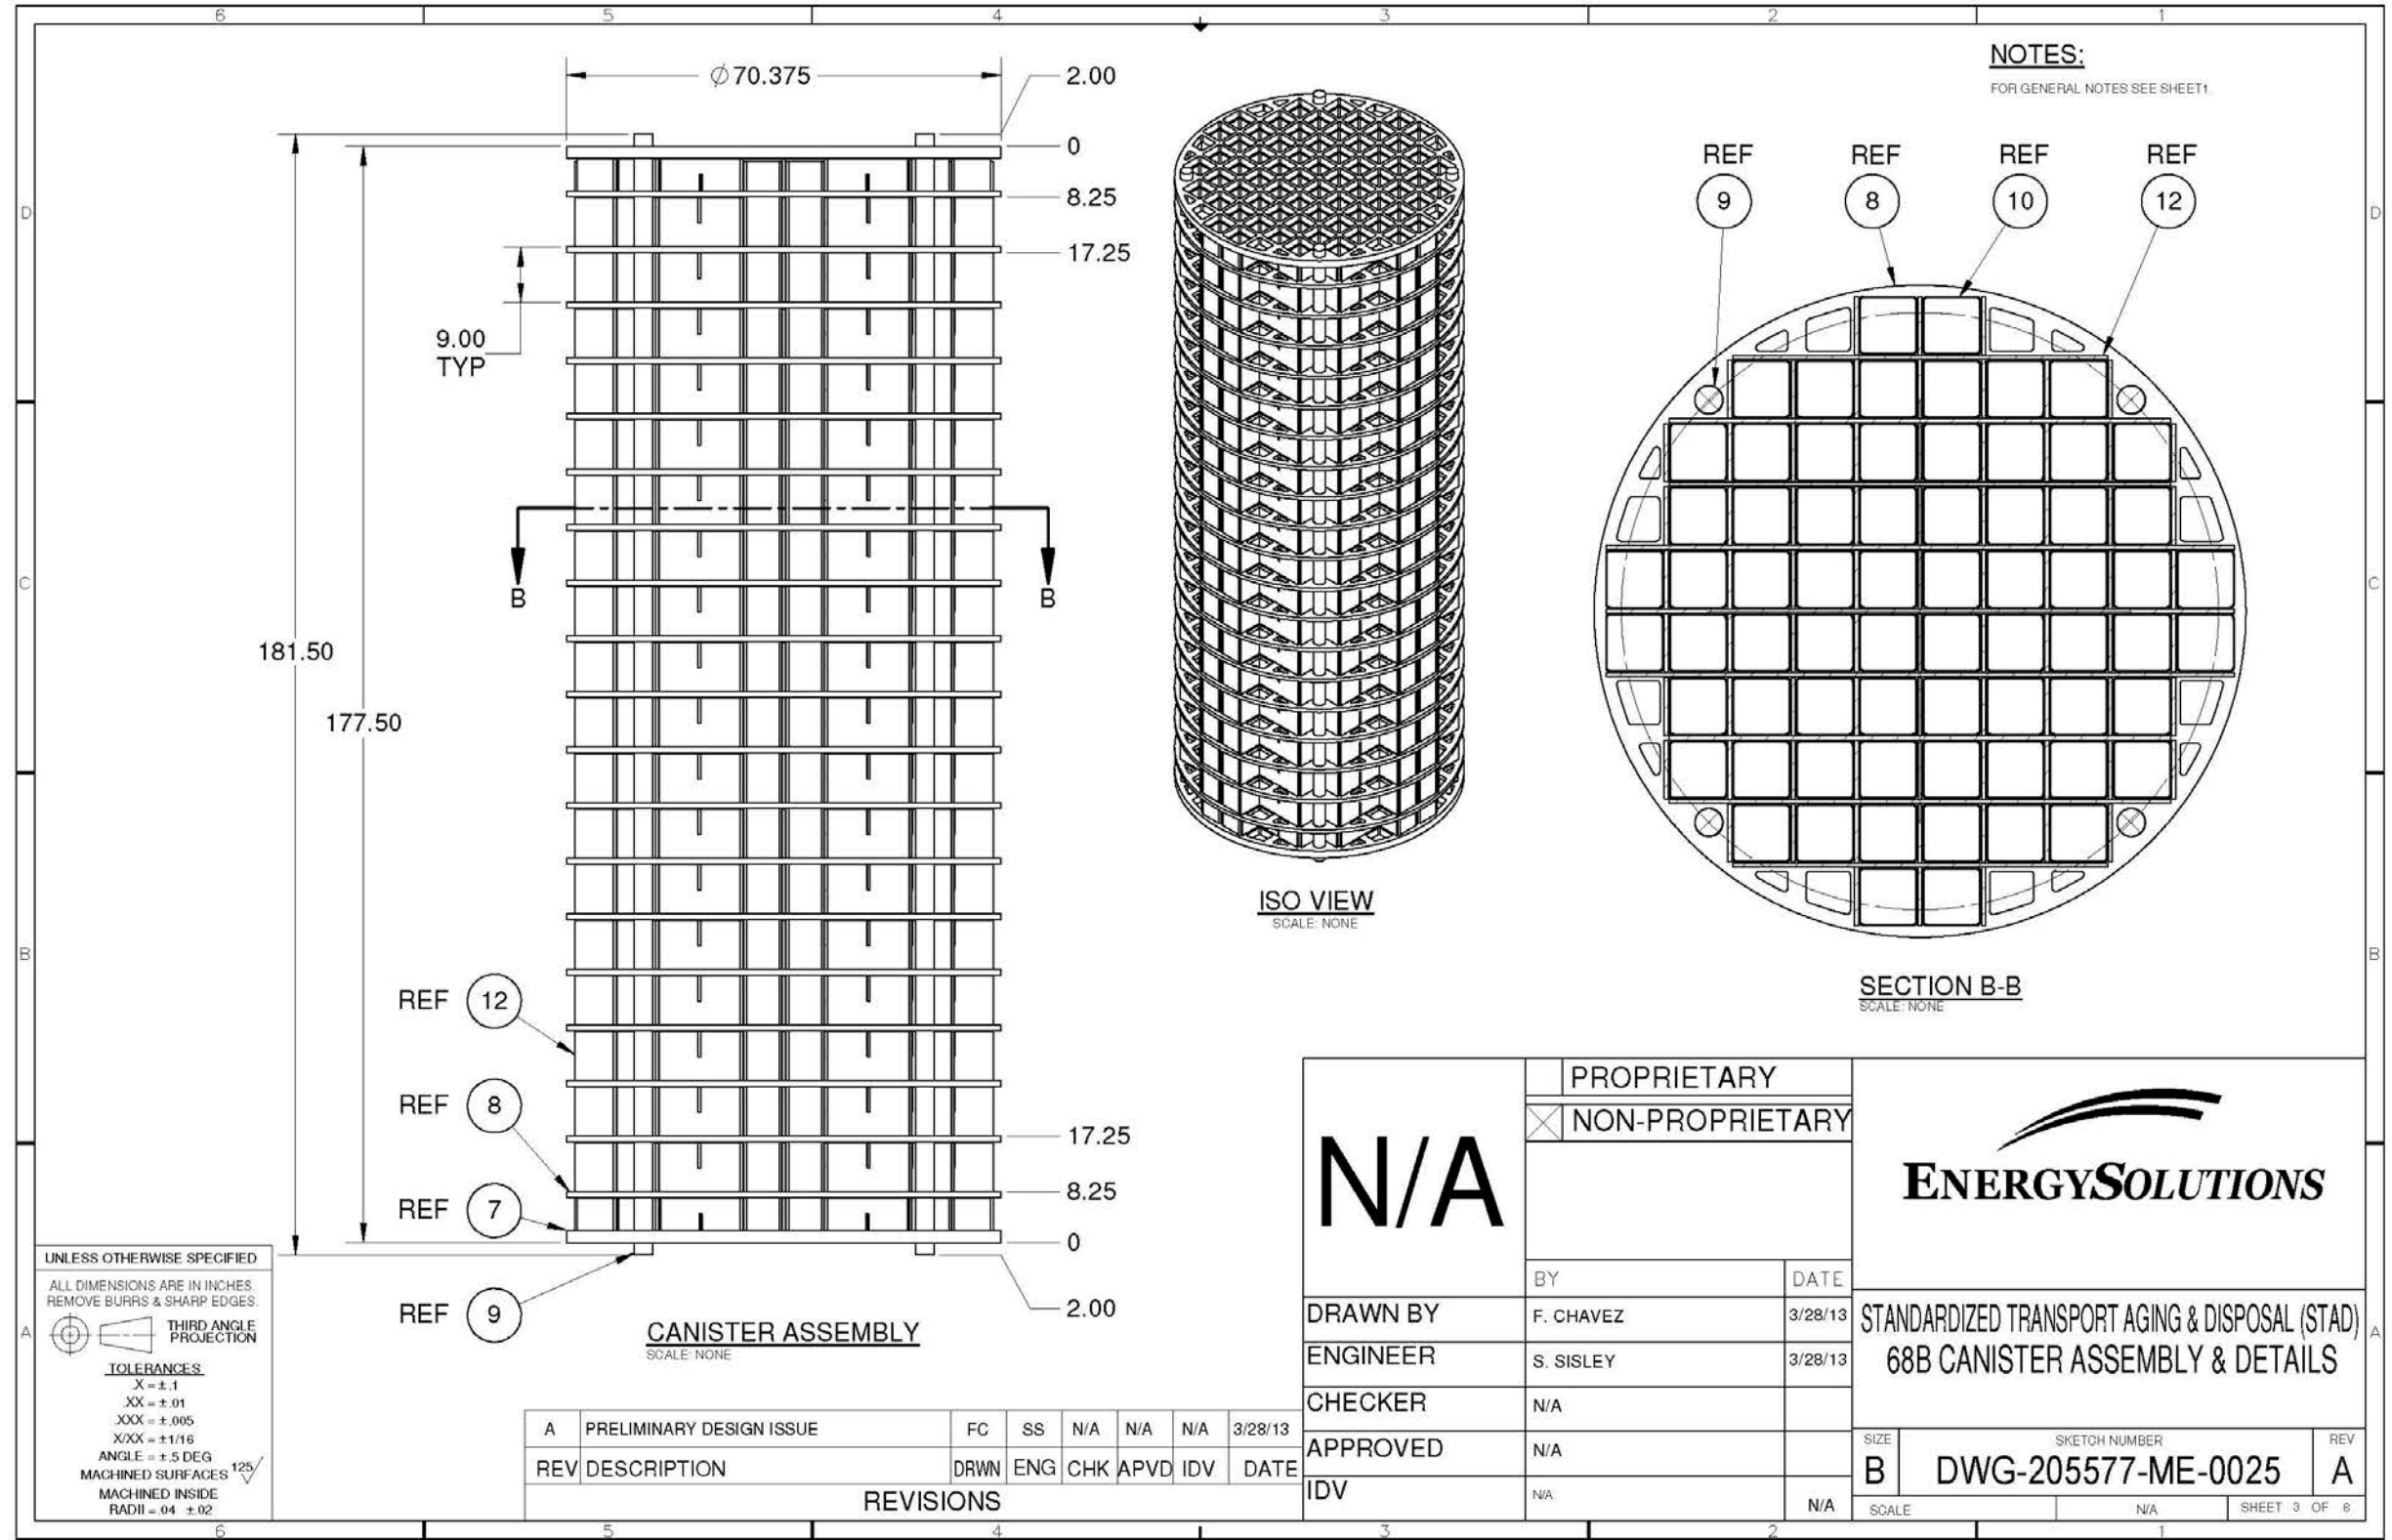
Standardized Transport, Aging and Disposal Canister - 68 BWR Assemblies - Assembly & Details – Sheet 4 of 6
